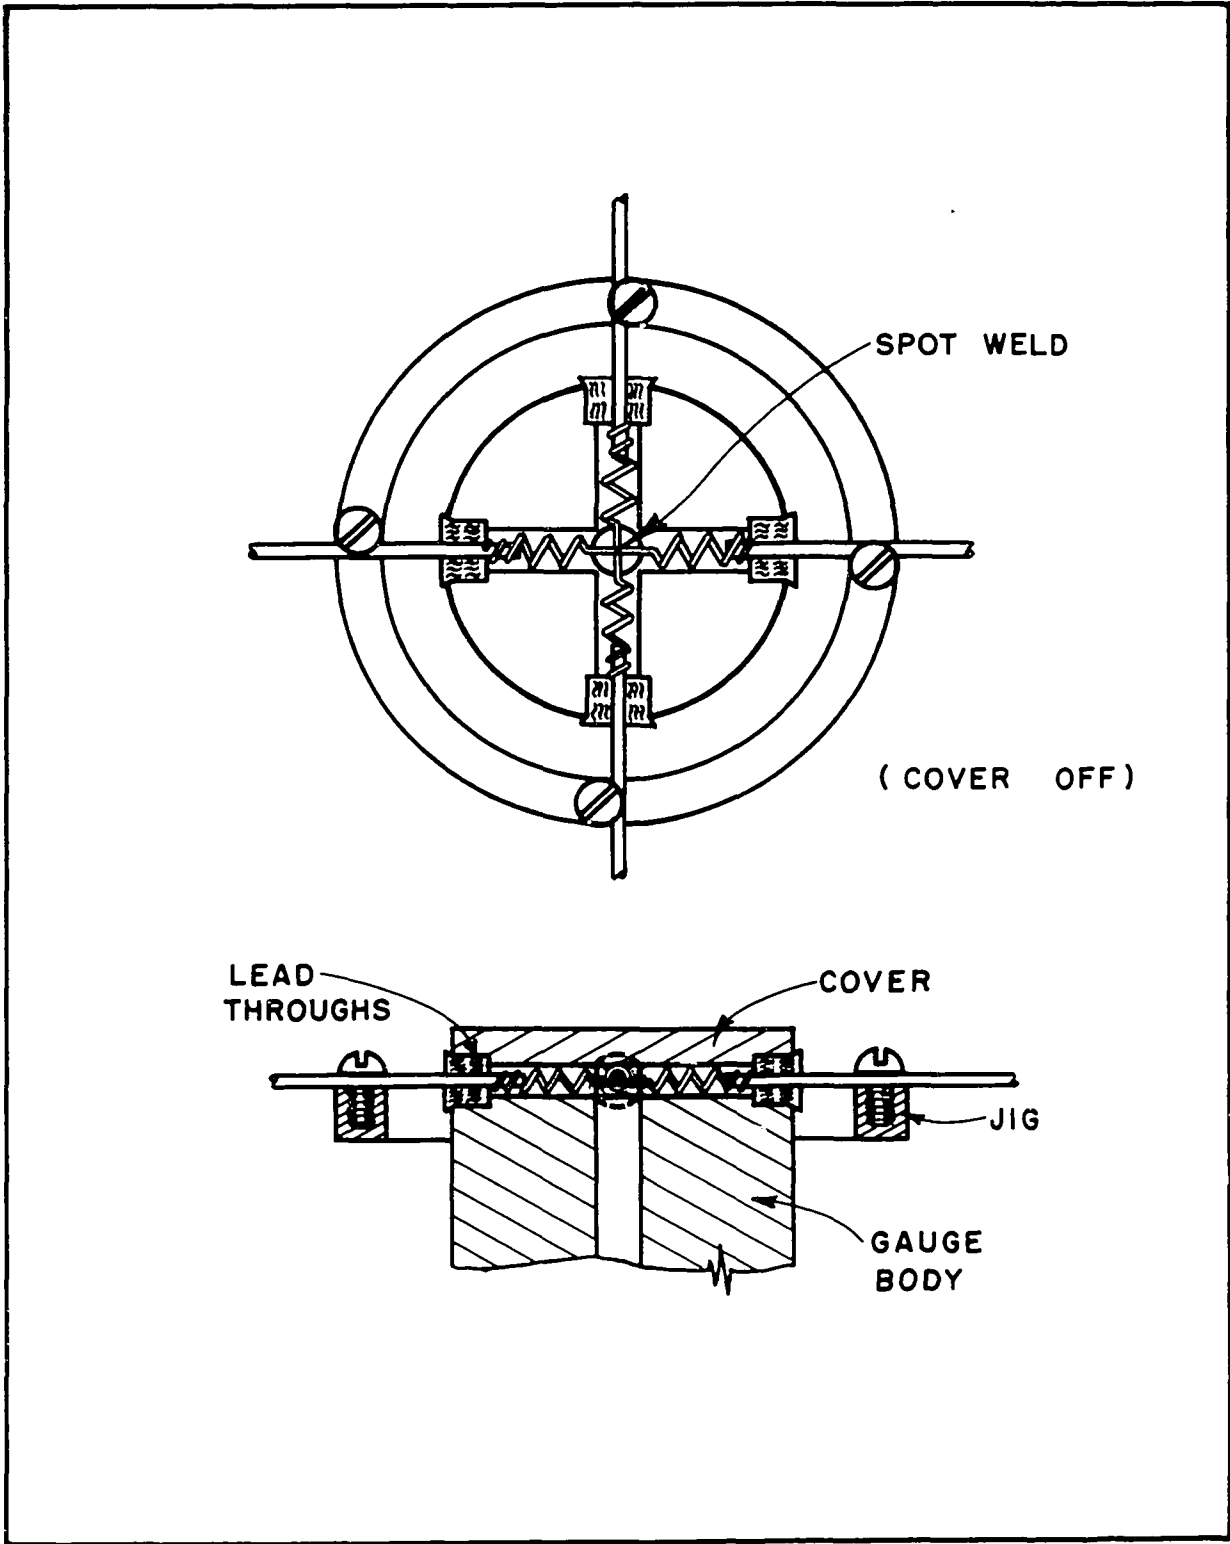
CONSTRUCTION OF THE METAL GAUGE HEAD
